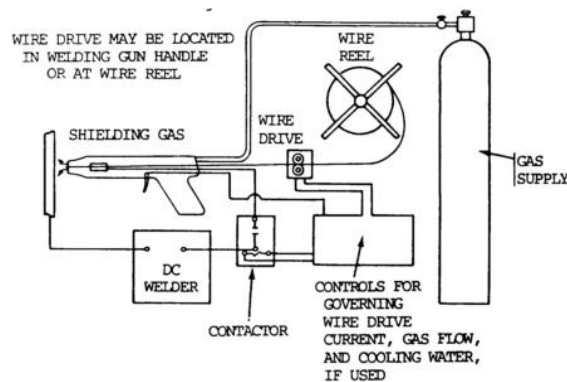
Traditional MIG welding machine schematic diagram (weldguru.com)
